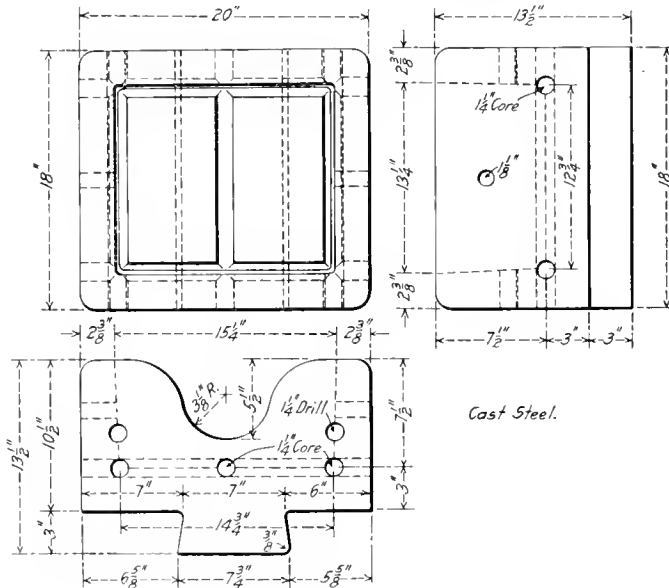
Foundation Die for 4,000 lb. Steam Hammer; Central of New Jersey.
